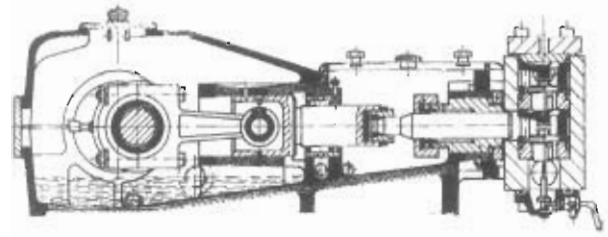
Horizontal plunger pump with monoblock liquid end and wing guided valves
